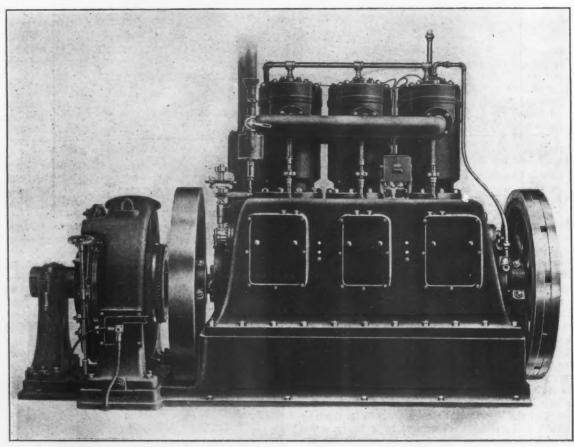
A 150-Hp. Turner-Fricke Gas Engine Directly Connected to a 90-Kw. Generator.
